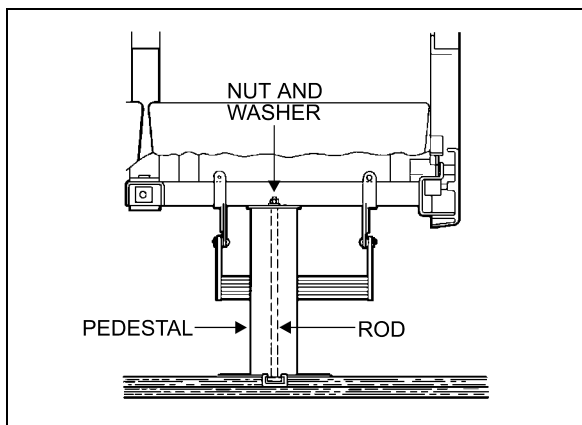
SEAT PEDESTAL ASSEMBLY 18107
